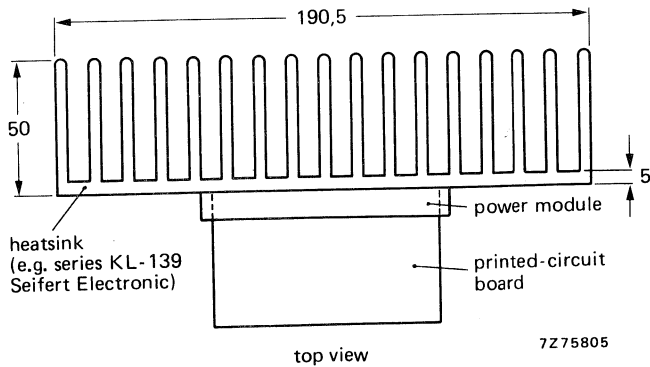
Example of a heatsink to be used for the module; dimensions in mm.
